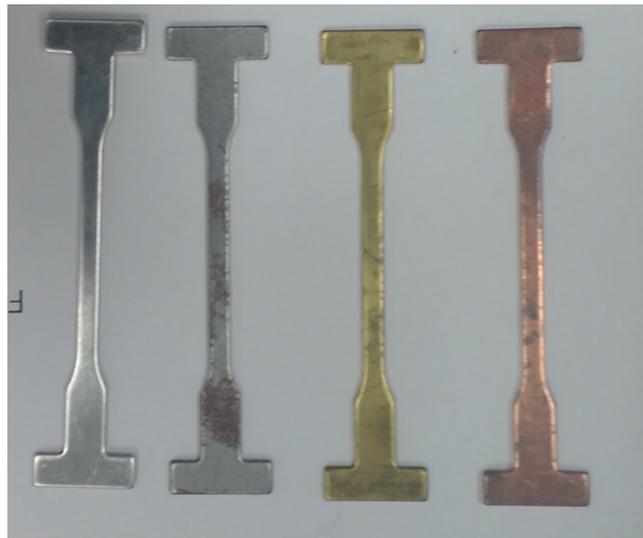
Tensile specimens that are sold with the machine by the manufacturer. Source: Author
